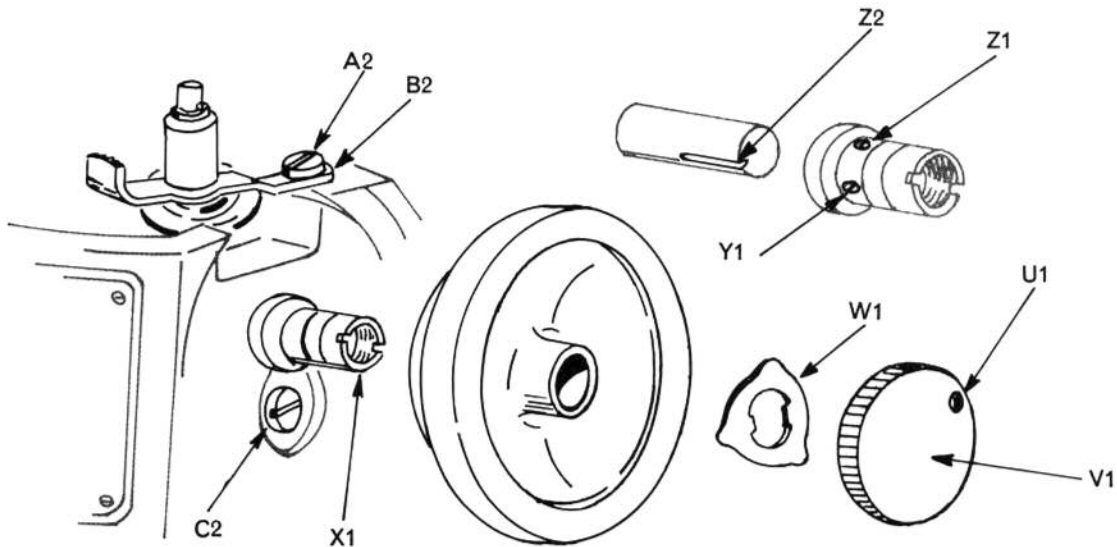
Hand Wheel and Bobbin Winder Assembly.
